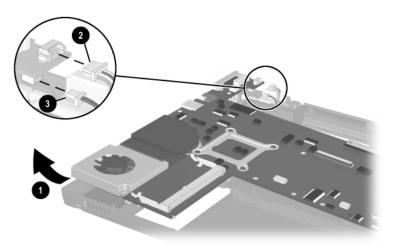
Disconnecting the External Battery Terminal and NTSC Module Cables from the System Board
